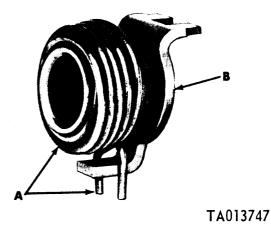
Assembling operating shaft spring and plate (code A pumps).
